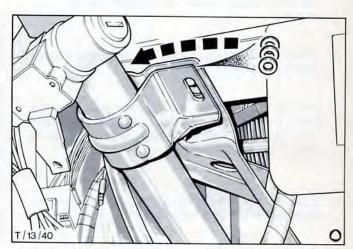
Insert 2 mm thick washers between steering shaft and column brackets.
